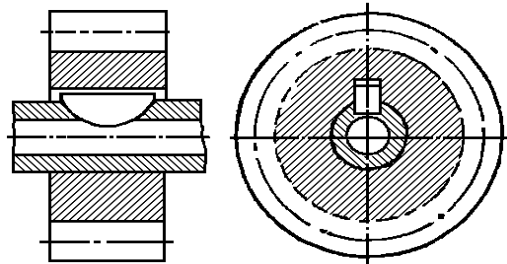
The semicircular key joint of the gear with the shaft
